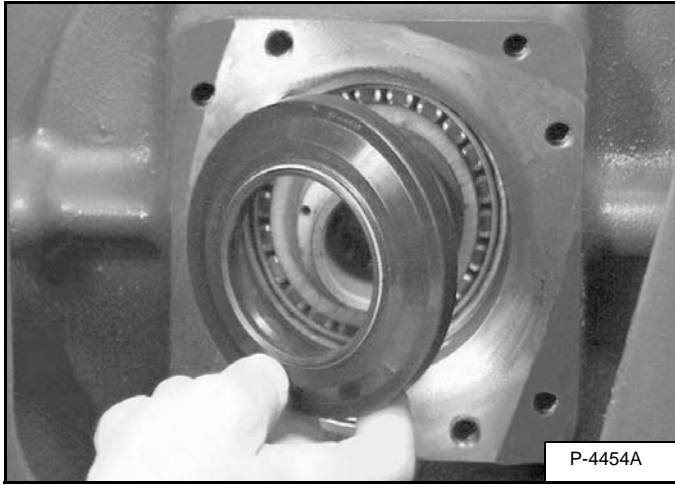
shows the motor carrier seal correctly installed.
